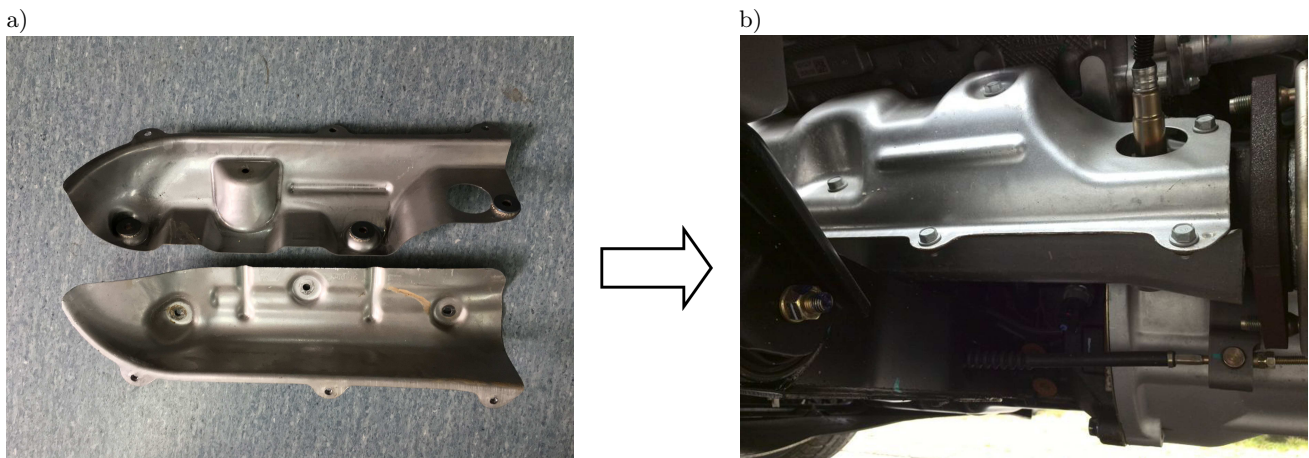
Installed status of the original heat shield: a) heat shield, b) installed status.
